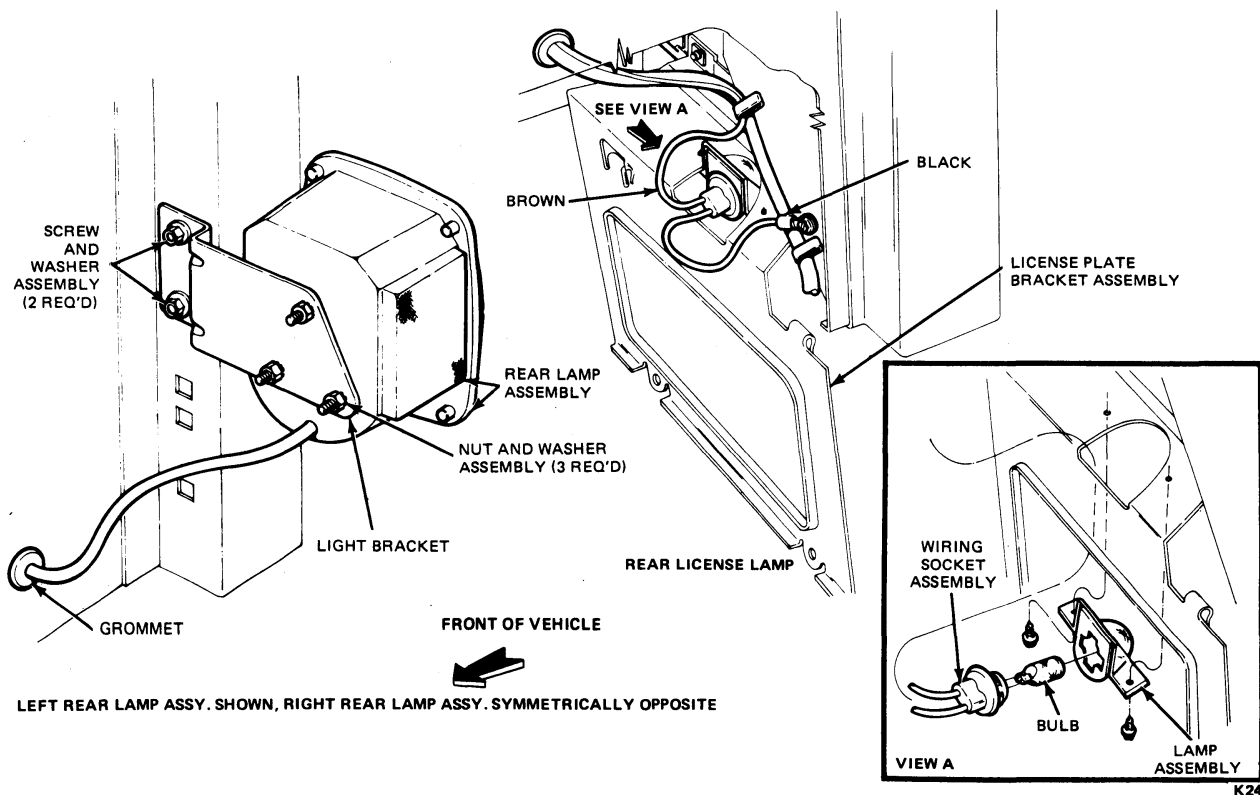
Rear Side Marker and License Plate Lamps—F-100, F-150, and F-250, Flare Side Pick-Up
